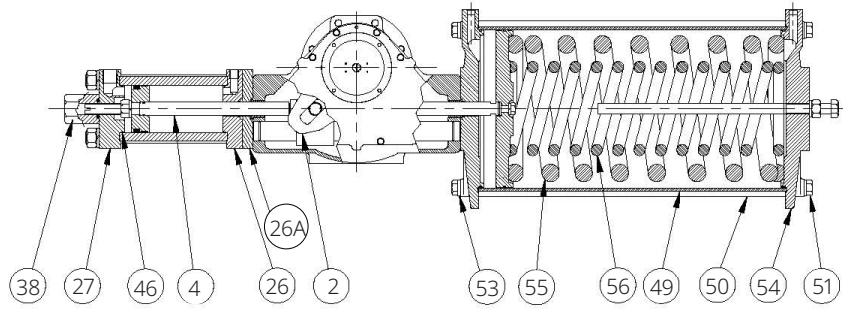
Single-Acting Spring-Return Two Pistons - Model HP80 Series
